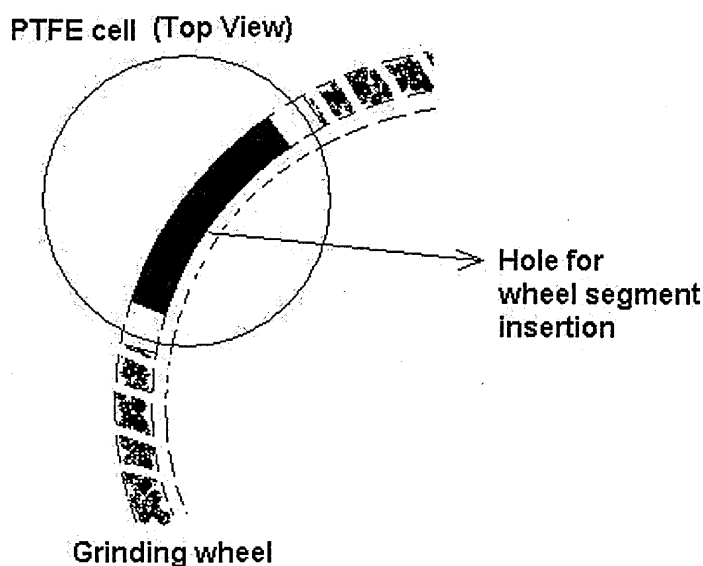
Top view of the custom cell constructed for EIS tests. Hole at the bottom made in the shape of a wheel segment
